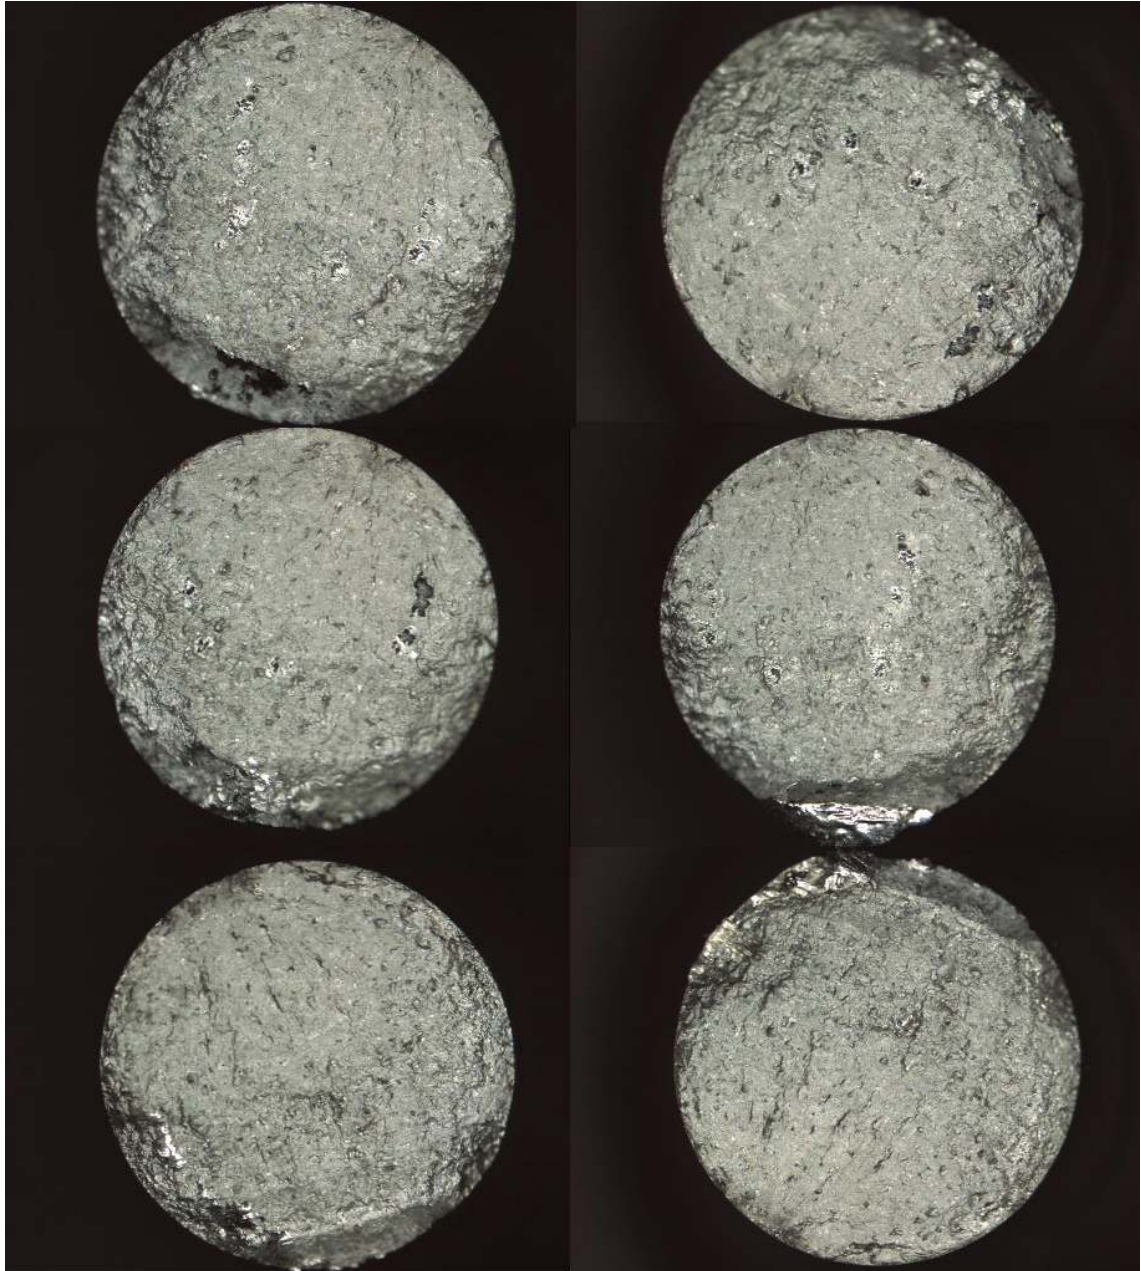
XY direction annealing heat treated fatigue specimens fracture surface
